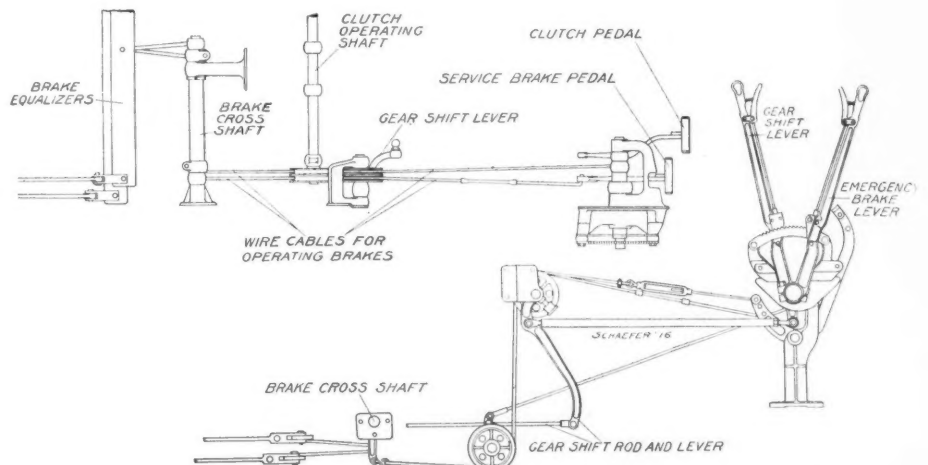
Mogul Brake, Clutch and Progressive-Type Gear Control
